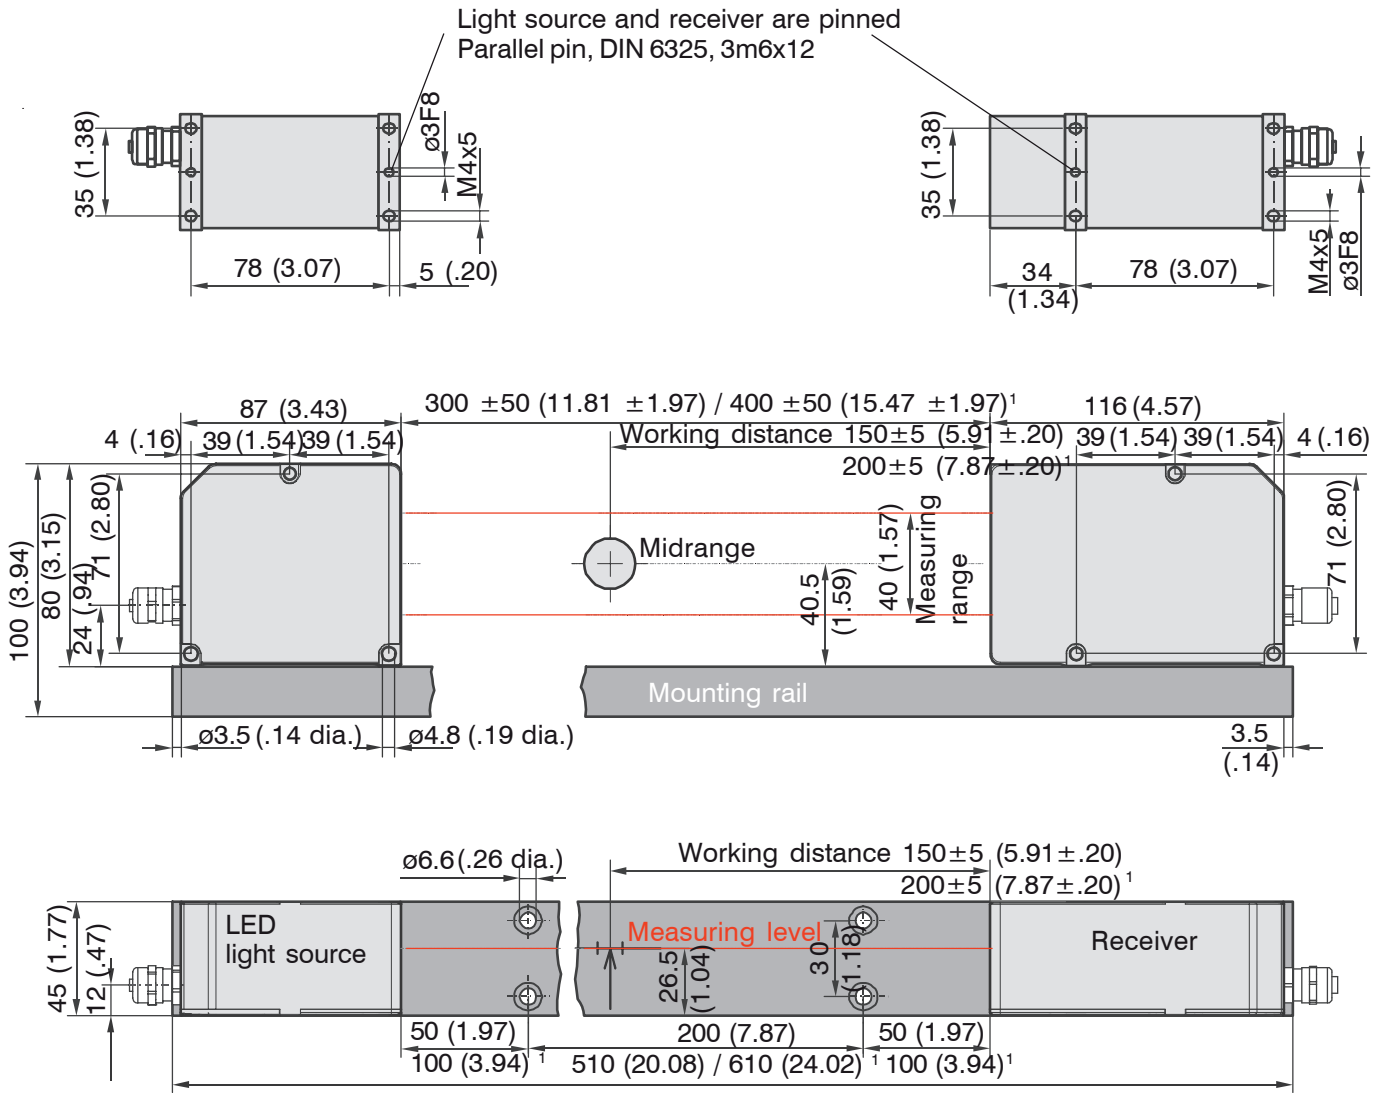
Dimensional drawing of the sensor unit with mounting rail
